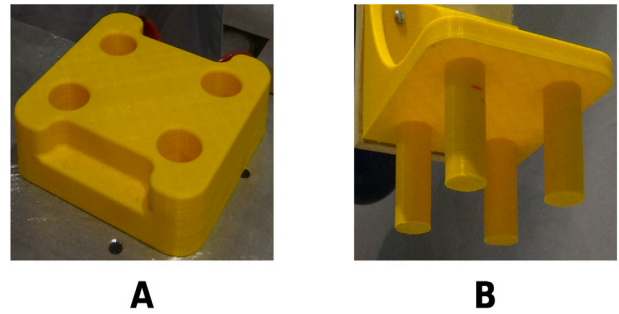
Components used for co-assembly task: (A) A 3D printed plate with four cylindrical holes of 28 mm diameter. (B) A 3D printed plate with four pegs each of 25 mm diameter.
